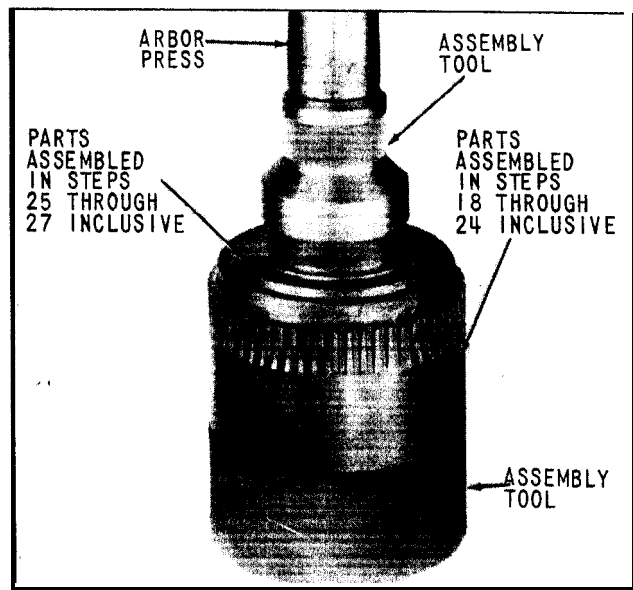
Pressing Forward Clutch Cylinder into Ring Gear
